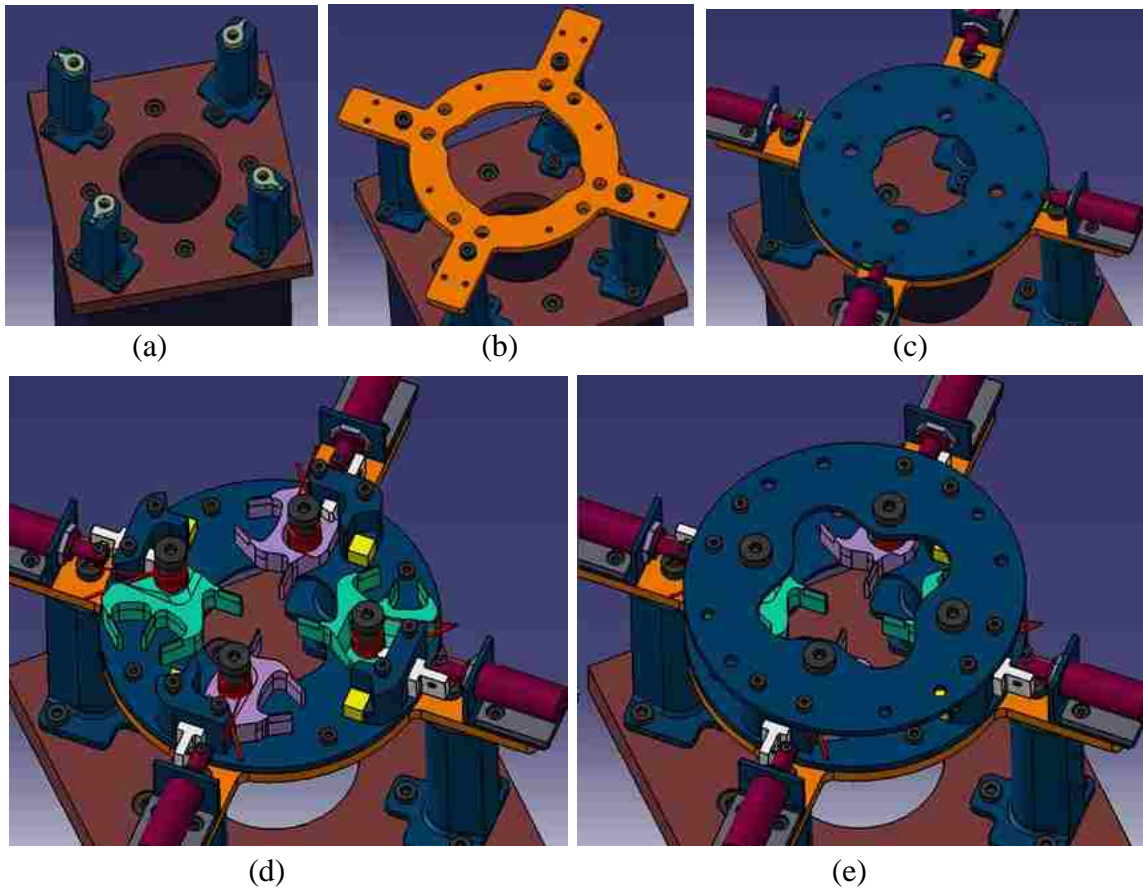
CAD model assembly of the quadrotor adaptive cutter design. (a) Support legs with Dytran 1210V2 load cells. (b) Elevated platform. (c) Back cover and solenoid substructure. (d) Full assembly with front cover removed. (e) Full assembly with front cover.
